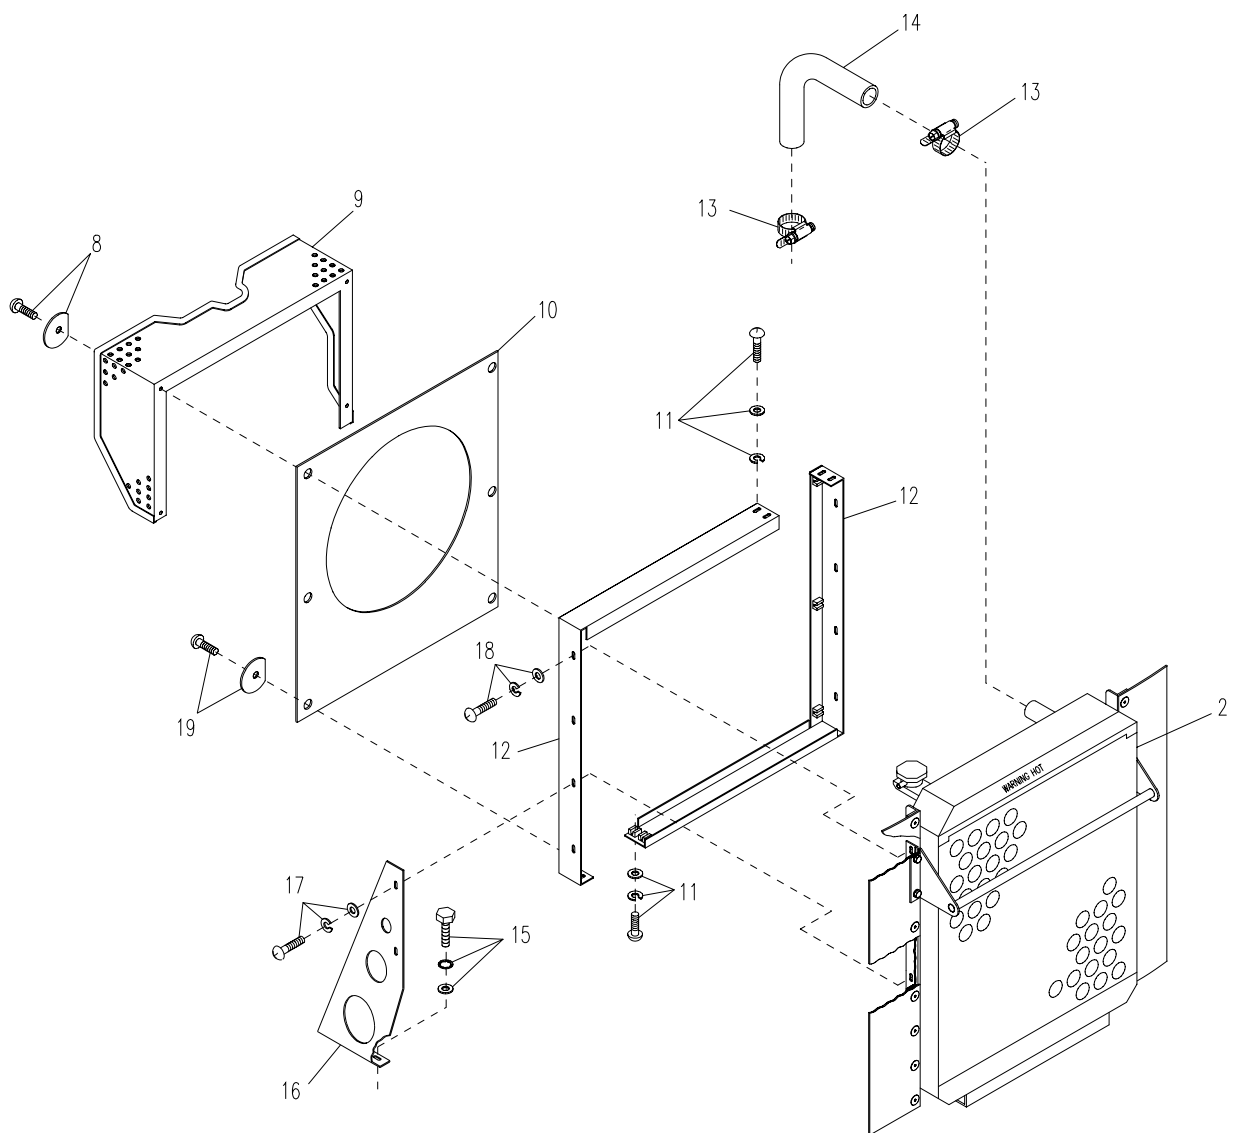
Fan Guard, Fan Shroud, and Shroud Housing (Sheet 2)
